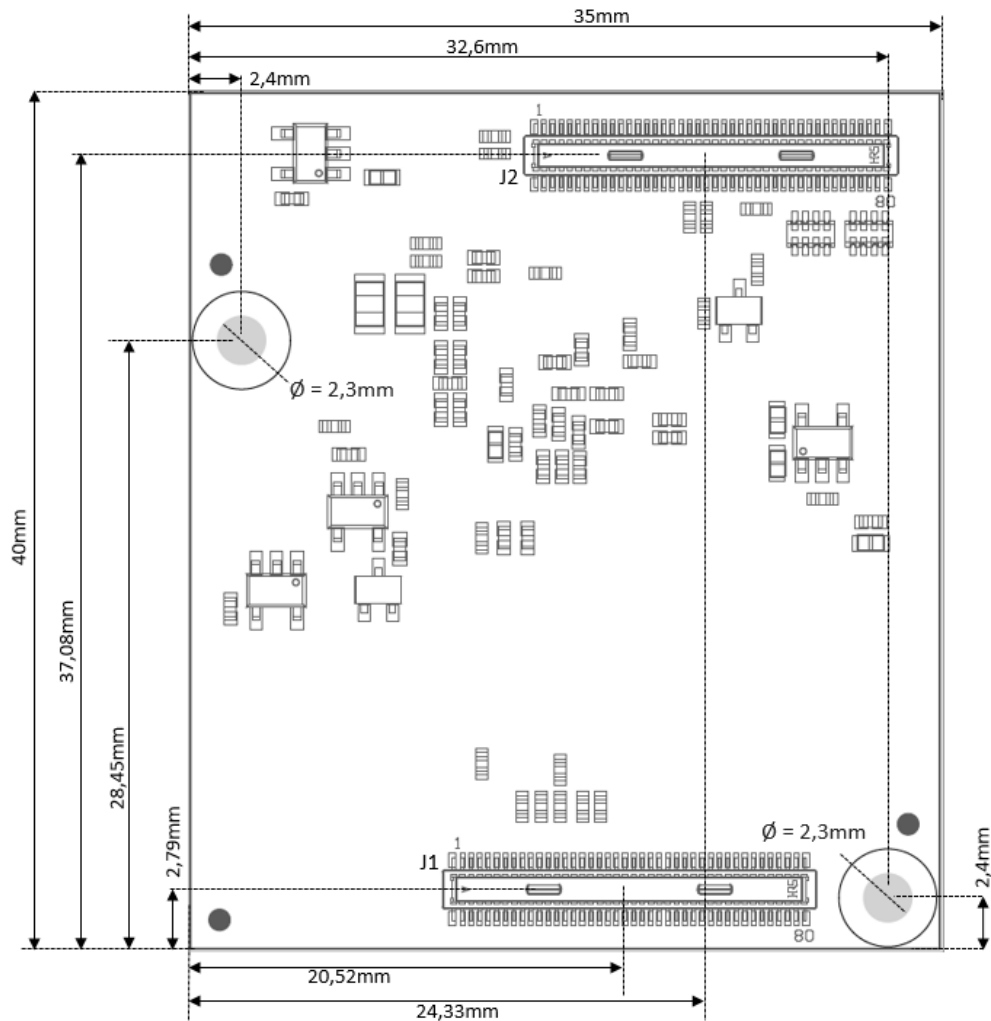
Mechanical Dimensions [mm] (Bottom View)
